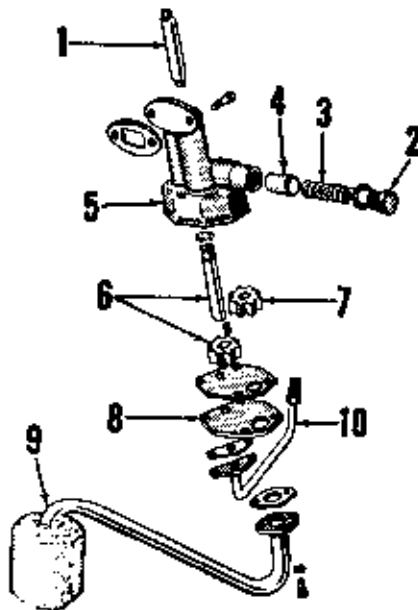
Exploded view of gear type oil pump assembly used in original production of the model NAA tractor. Pump body (5) may be either cast iron or die cast.
